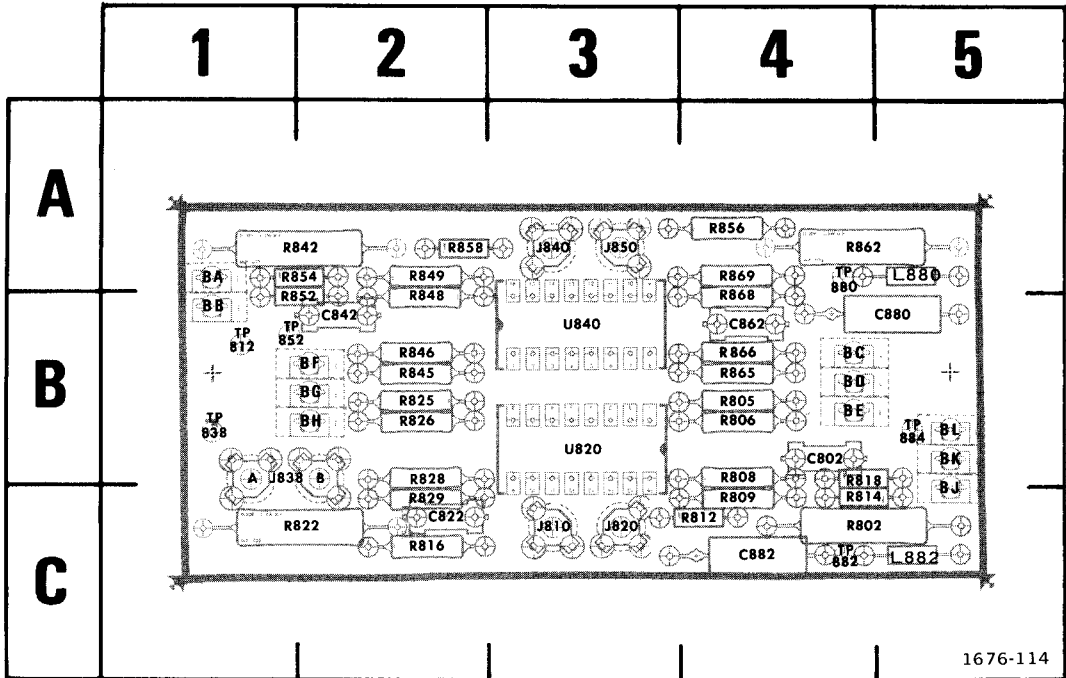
A18—Horizontal Interface circuit board assembly.
